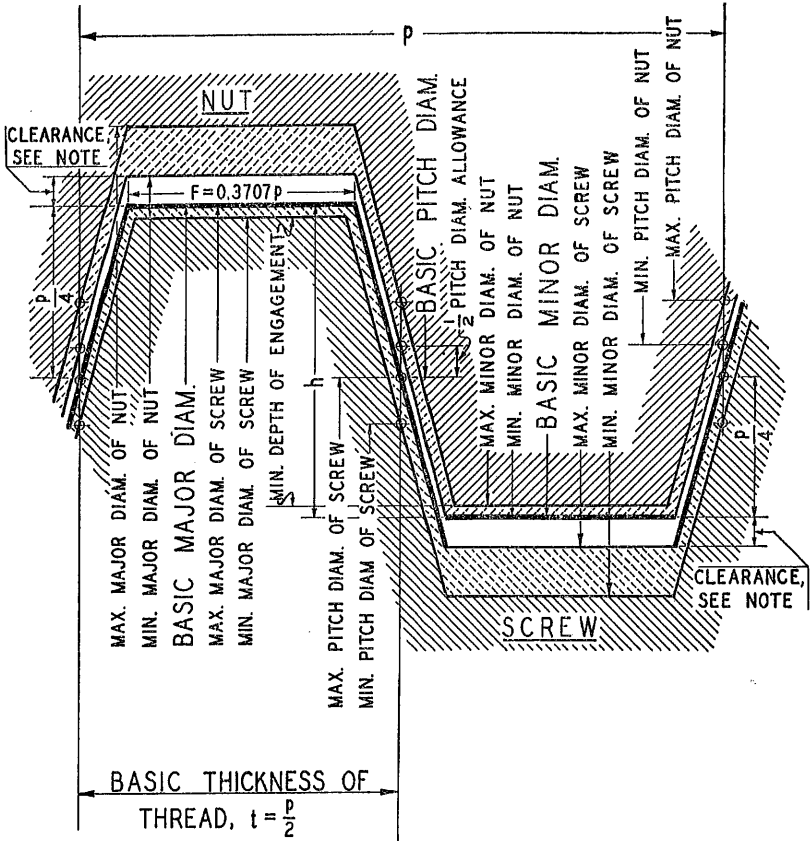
Illustration of allowances, tolerances, and crest clearances, Acme threads.
